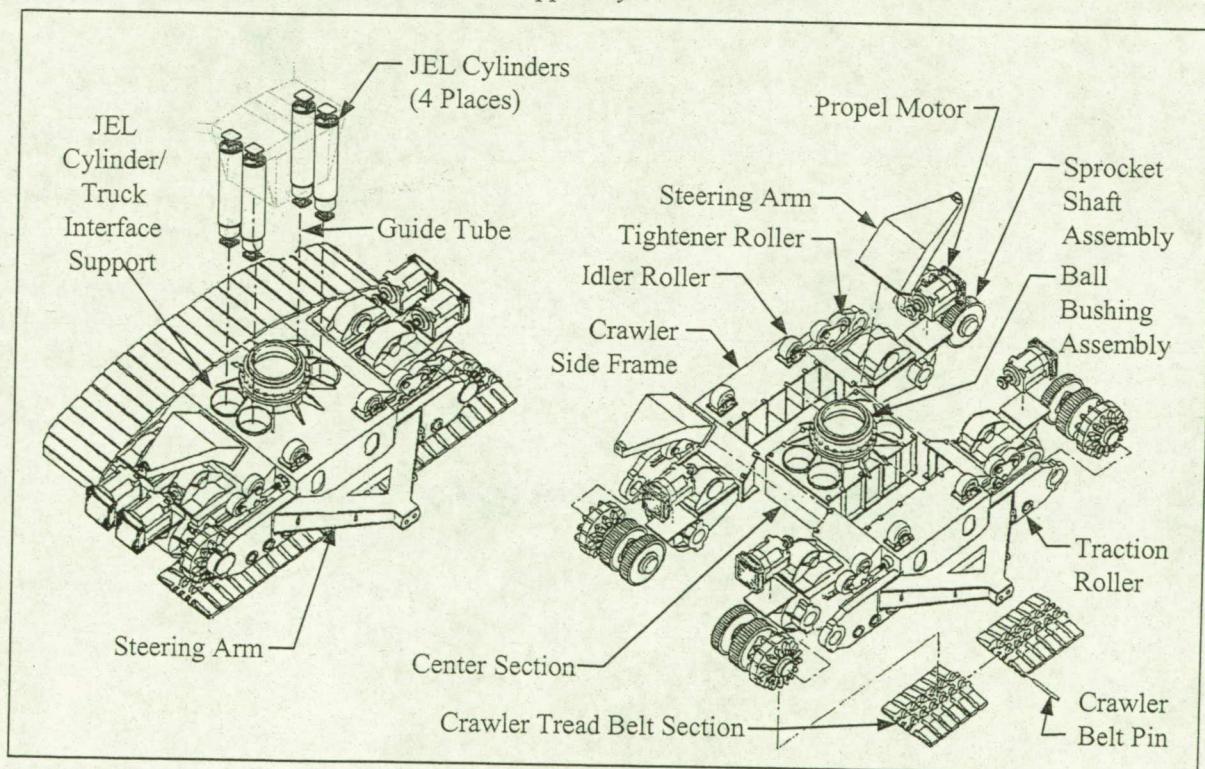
Crawler Transporter (CT) JEL System, Truck Assembly and Drive (Propel) System
